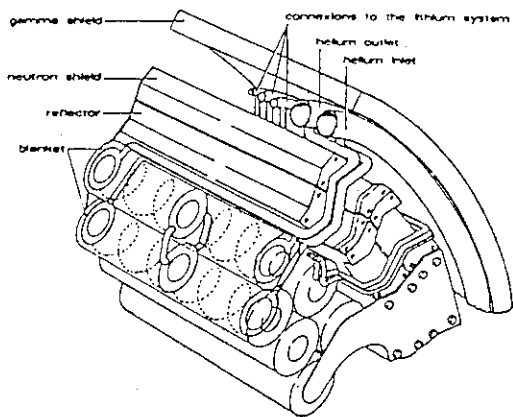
Arrangement of blanket and shield units.¹²⁾
